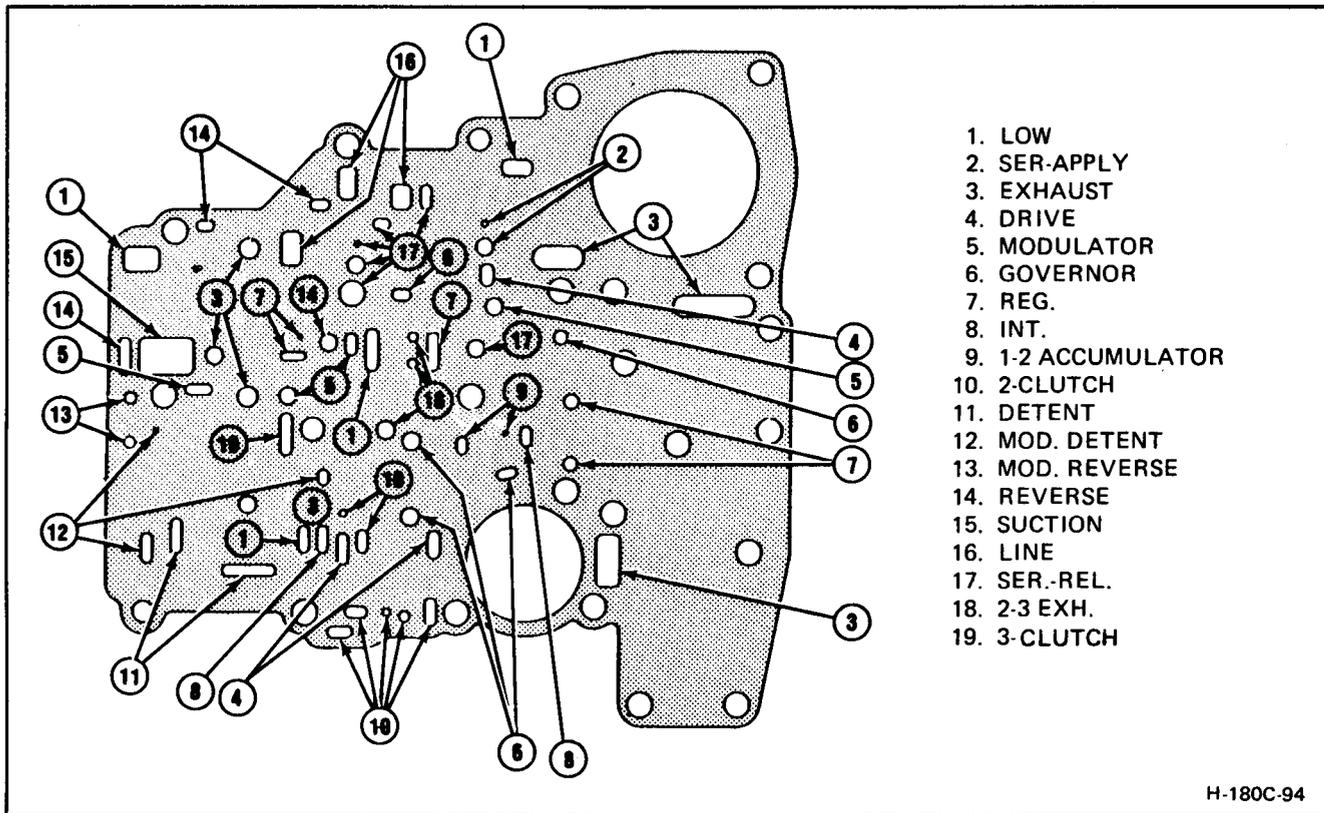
C-17 Valve Body Transfer Plate Oil Passages
